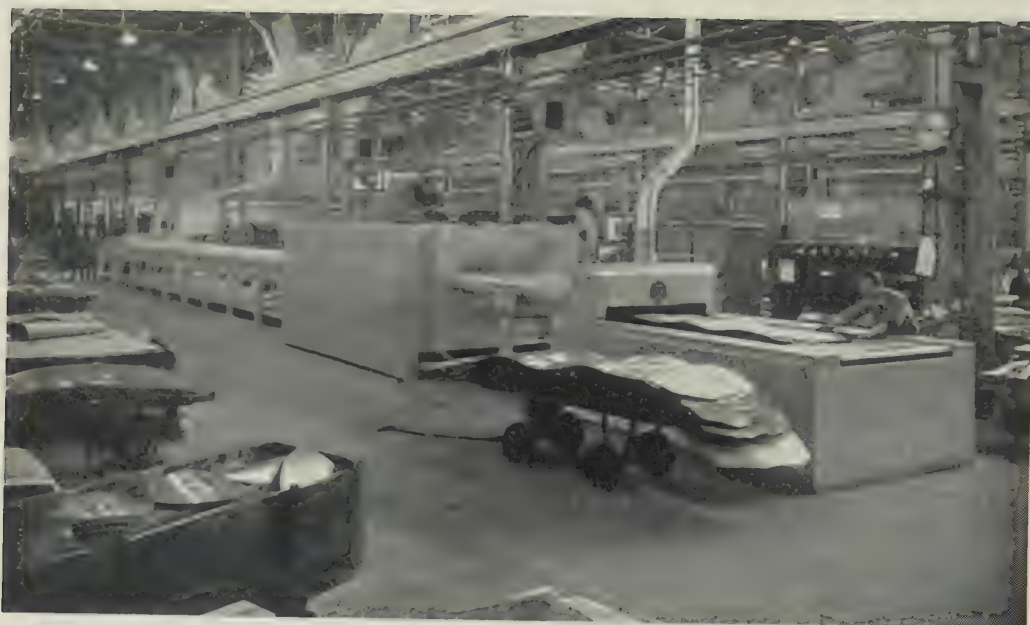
Belt Conveyor Type Continuous Furnace for Copper Sheets.
